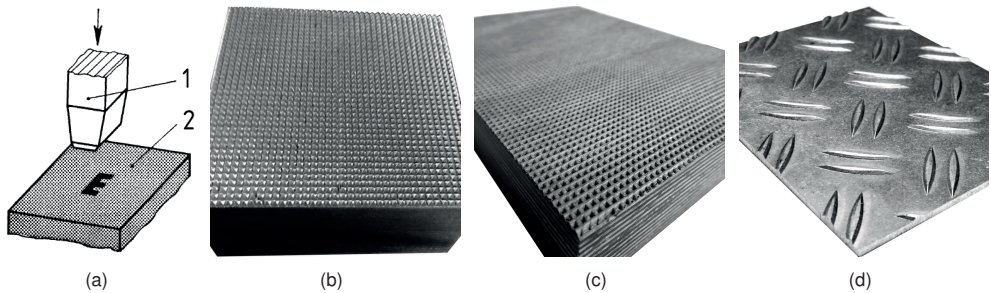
Embossing: (a) embossing punch [108]; (b) used embossing punch with pyramid pattern; (c) final surface with negative imprint; (d) chequered plate.
